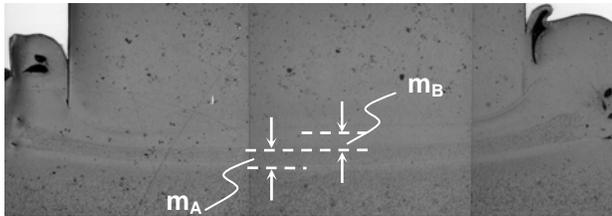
Butt joint structure for laser transmission welding of nylon 6 based plastics. Legend:  $m_A$  – melt layer thickness of the weld related to laser transmitting plastic;  $m_B$  – melt layer thickness of the weld related to absorbing plastic
